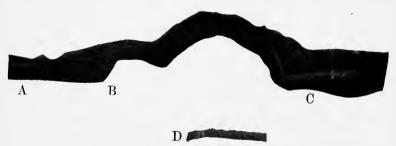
Photograph of a Magnified Longitudinal Section from One End of the Specimen shown in Fig. 61.
